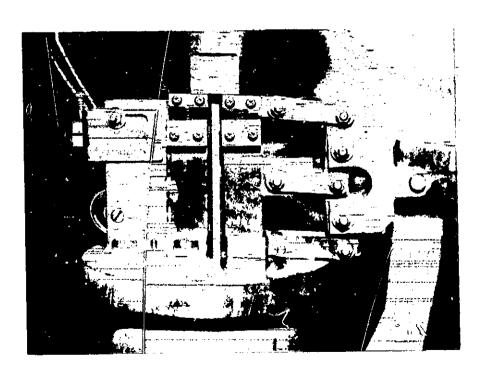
Close-up View of Compression Fixture Showing Method of Comping Specimen.
